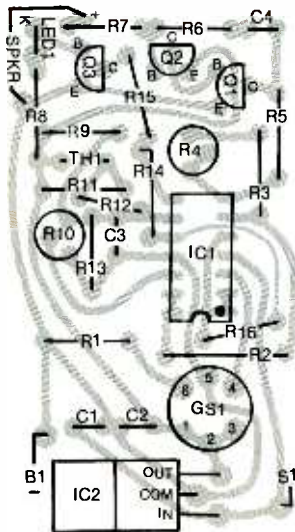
Wiring guide for pc board. Use this as a general component layout guide for point-to-point wiring.
